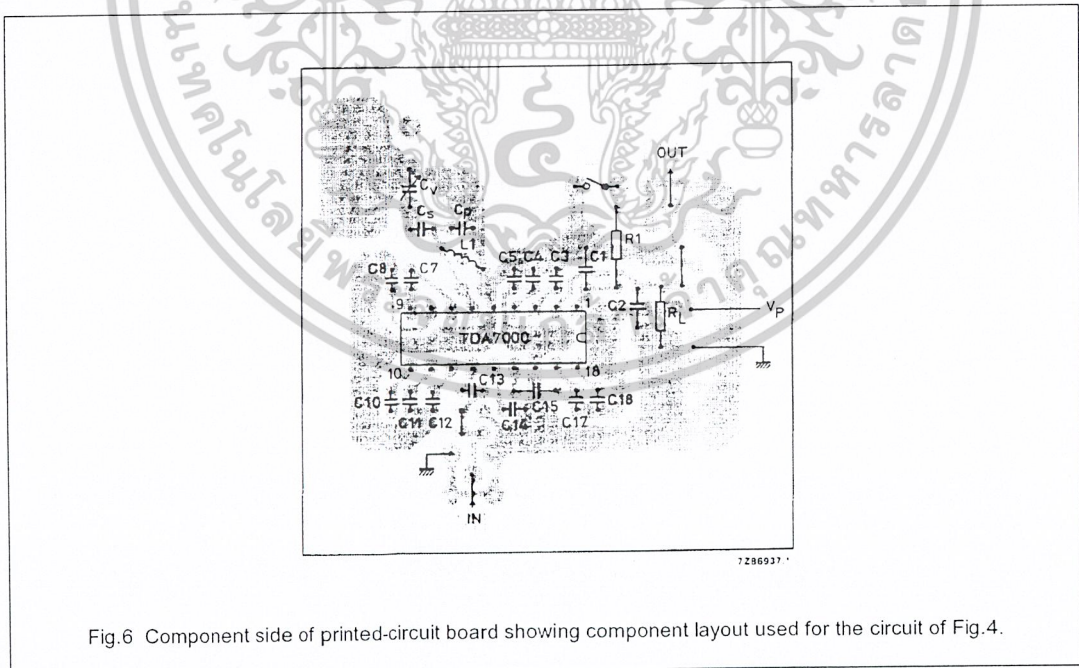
Component side of printed-circuit board showing component layout used for the circuit of Fig.4.
